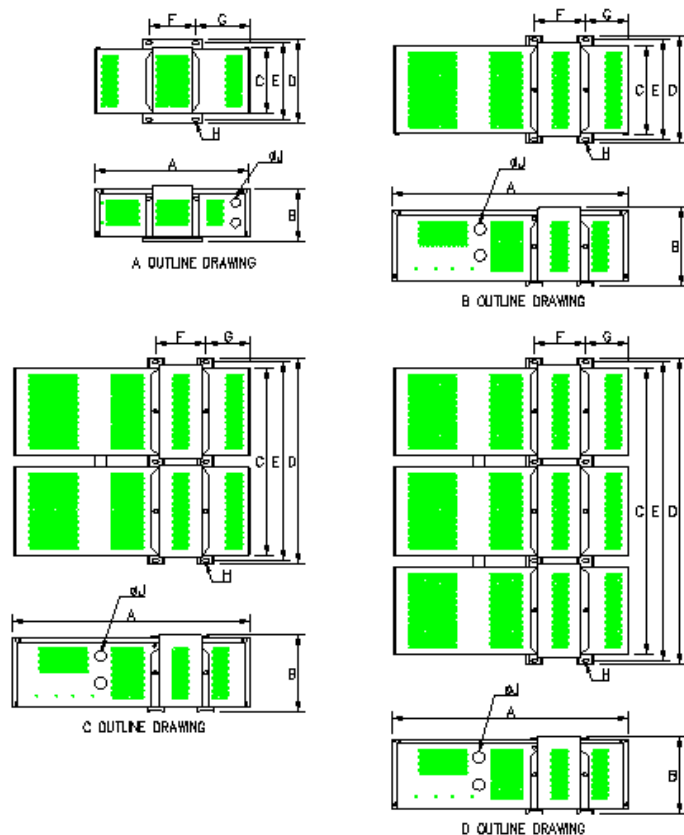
Power Conditioner Dimensions (Refer to Table 1)
